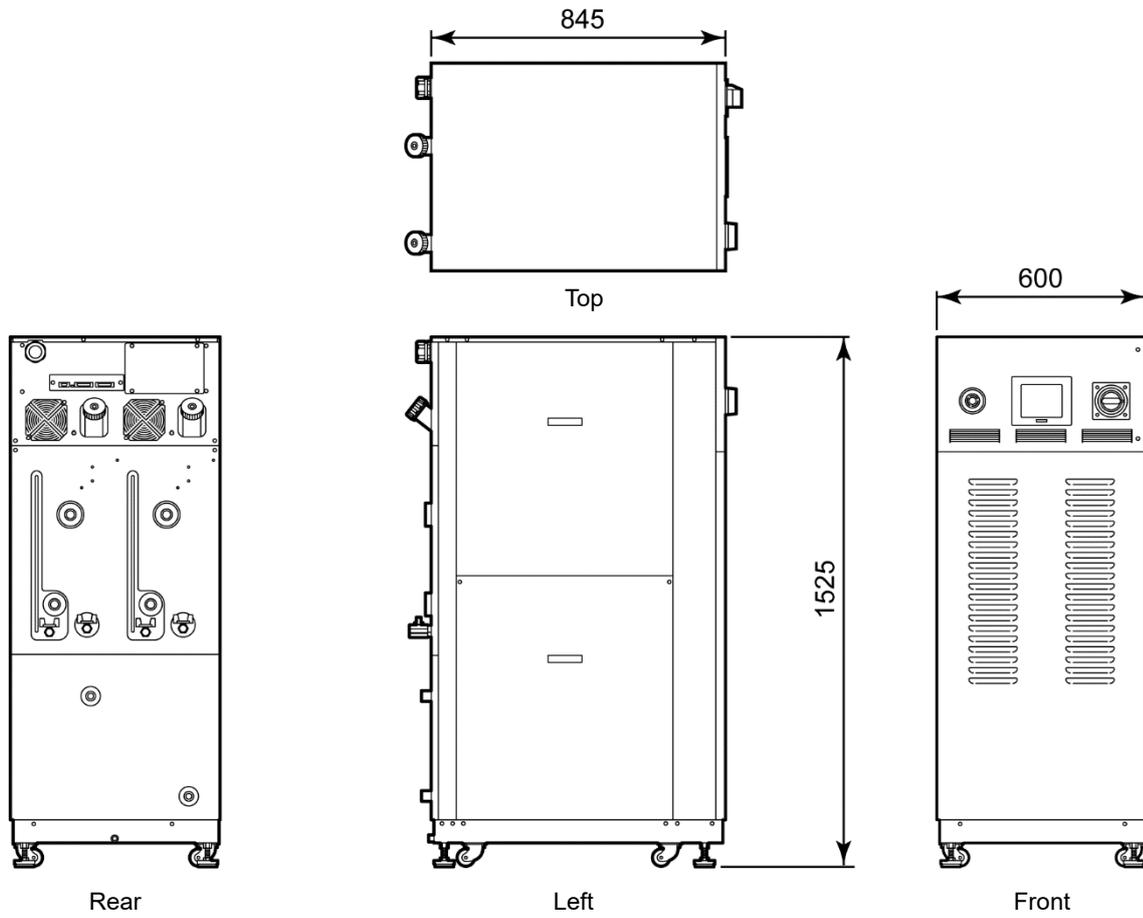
Outer Dimensions (Dimensional Tolerance: $\pm 10\text{mm}$)
